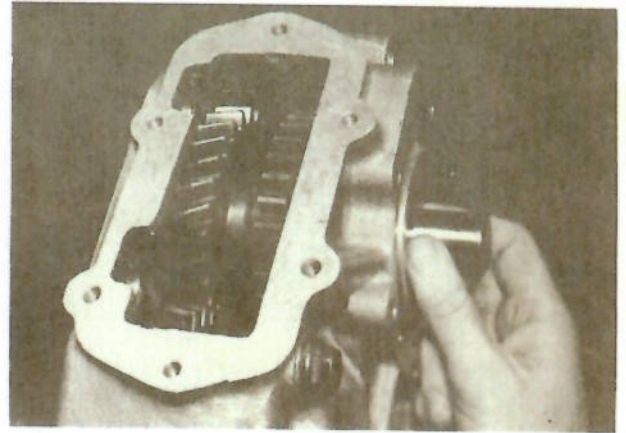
INSTALLING GUIDE SHAFT TOOL TO HOLD GEARS IN ALIGNMENT.
